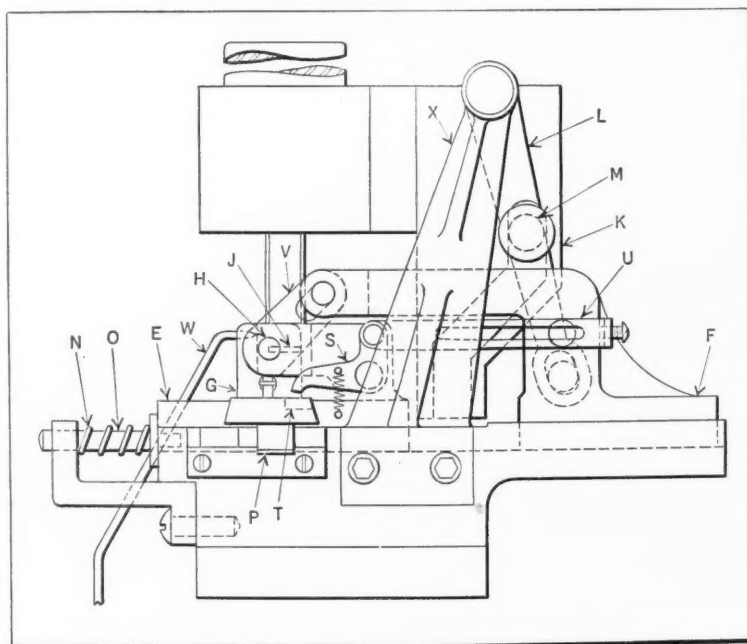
Side Elevation of Transfer Mechanism, Showing the Action of the Slides Operating the Transfer Member
